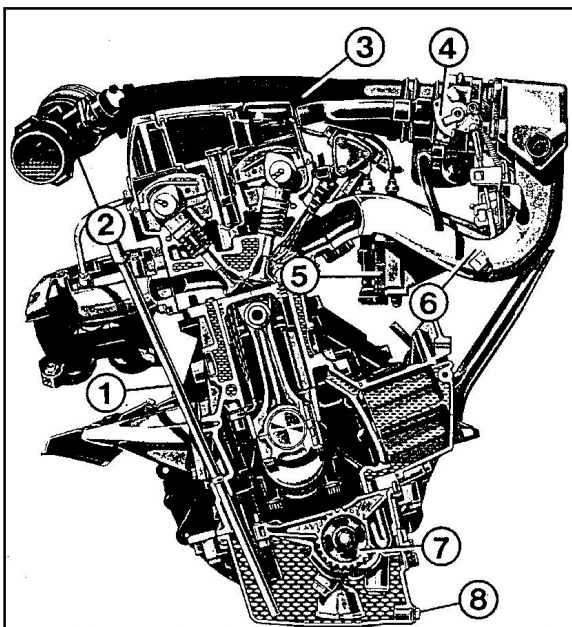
Sectional view of the engine with the location of some of the parts.
